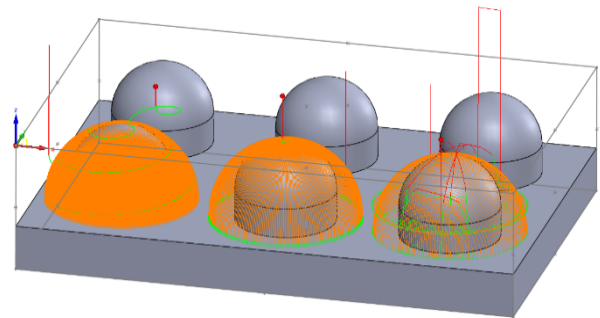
Toolpaths for 3-axis milling. From the left : Constant-Z, Radial and Linear
